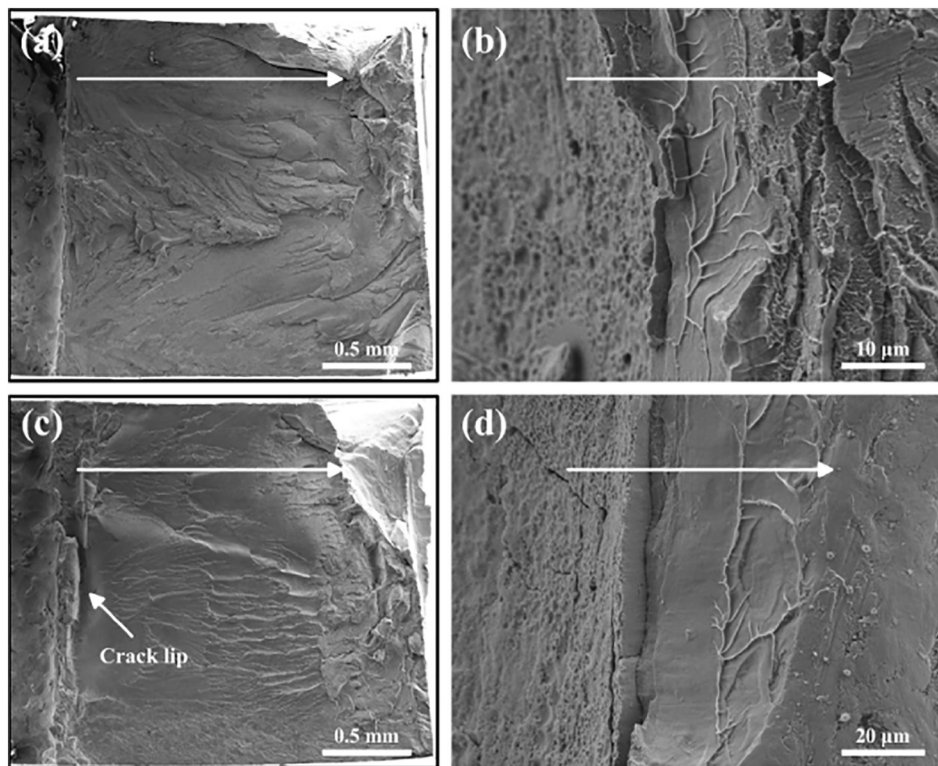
SEM images of the fracture morphology of as-cast and pre-compressed specimens. The white arrows indicate the crack propagation direction. (a) and (c) Fracture surfaces of the as-cast and pre-compressed specimens, respectively. (b) and (d) Shear-sliding zones and viscous fingering without cavitation in plain-stress regions of the as-cast and pre-compressed specimens, respectively.
